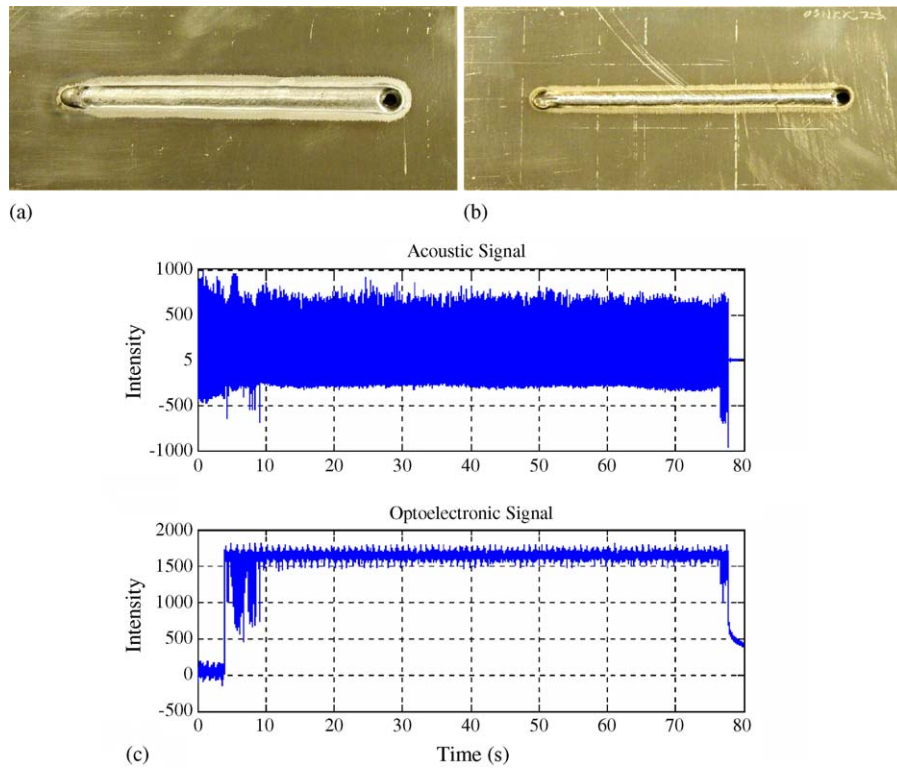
Results of Experiment I—normal VPPA welding process. (a) Front-side photograph of workpiece; (b) back-side photograph of workpiece; (c) acquired signals.
